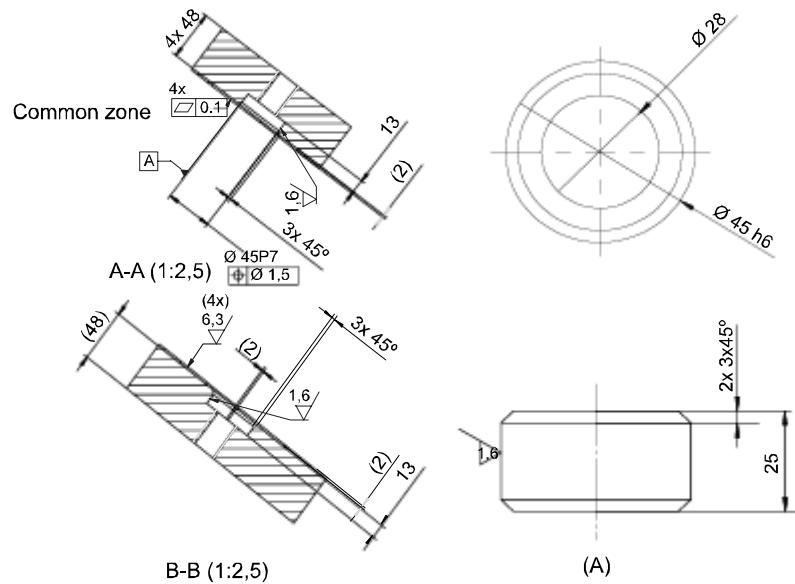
Sections of base plate and guide sleeve (dimensions in mm).
